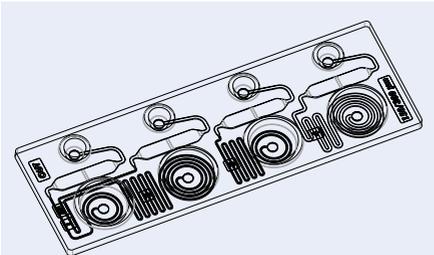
Schematic drawing of cuvette tank chip with incubation meander – Fluidic 576
